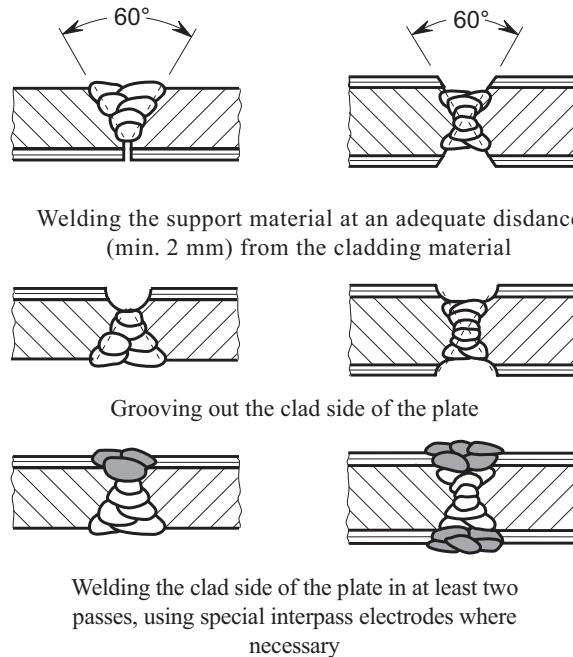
Weld shapes for welding of clad plates
